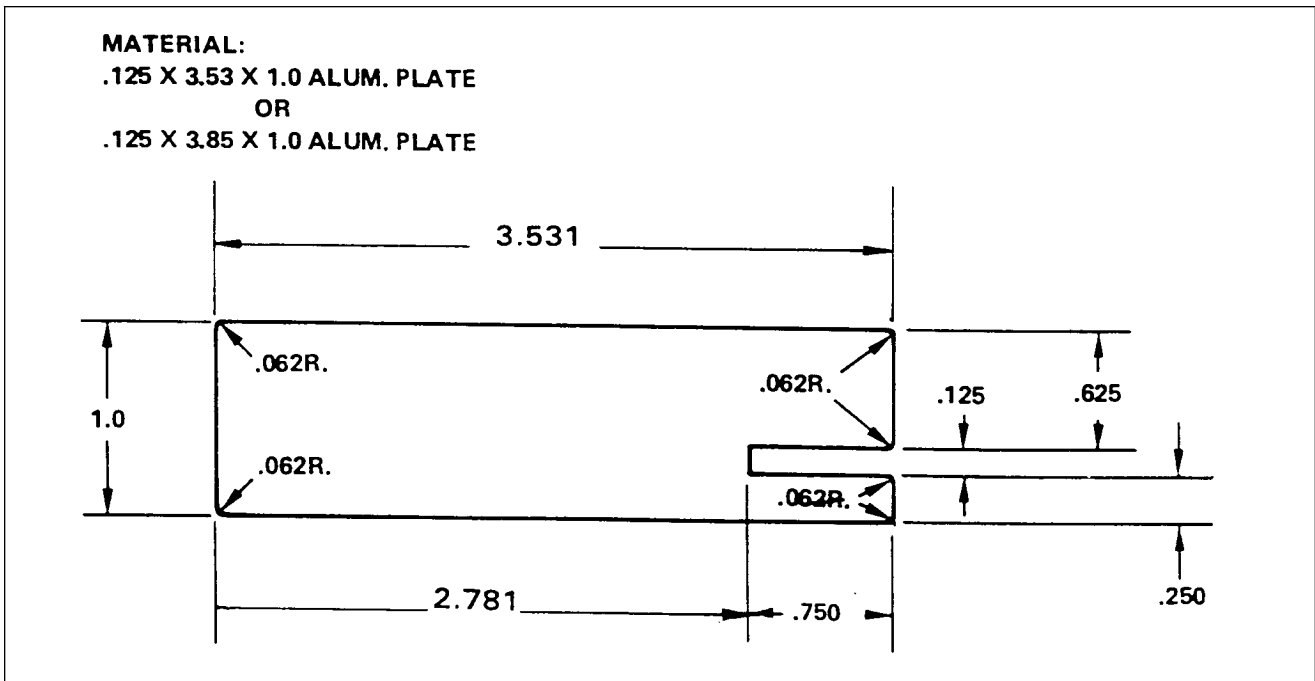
Fabricated Aileron Bellcrank Rigging Tool
